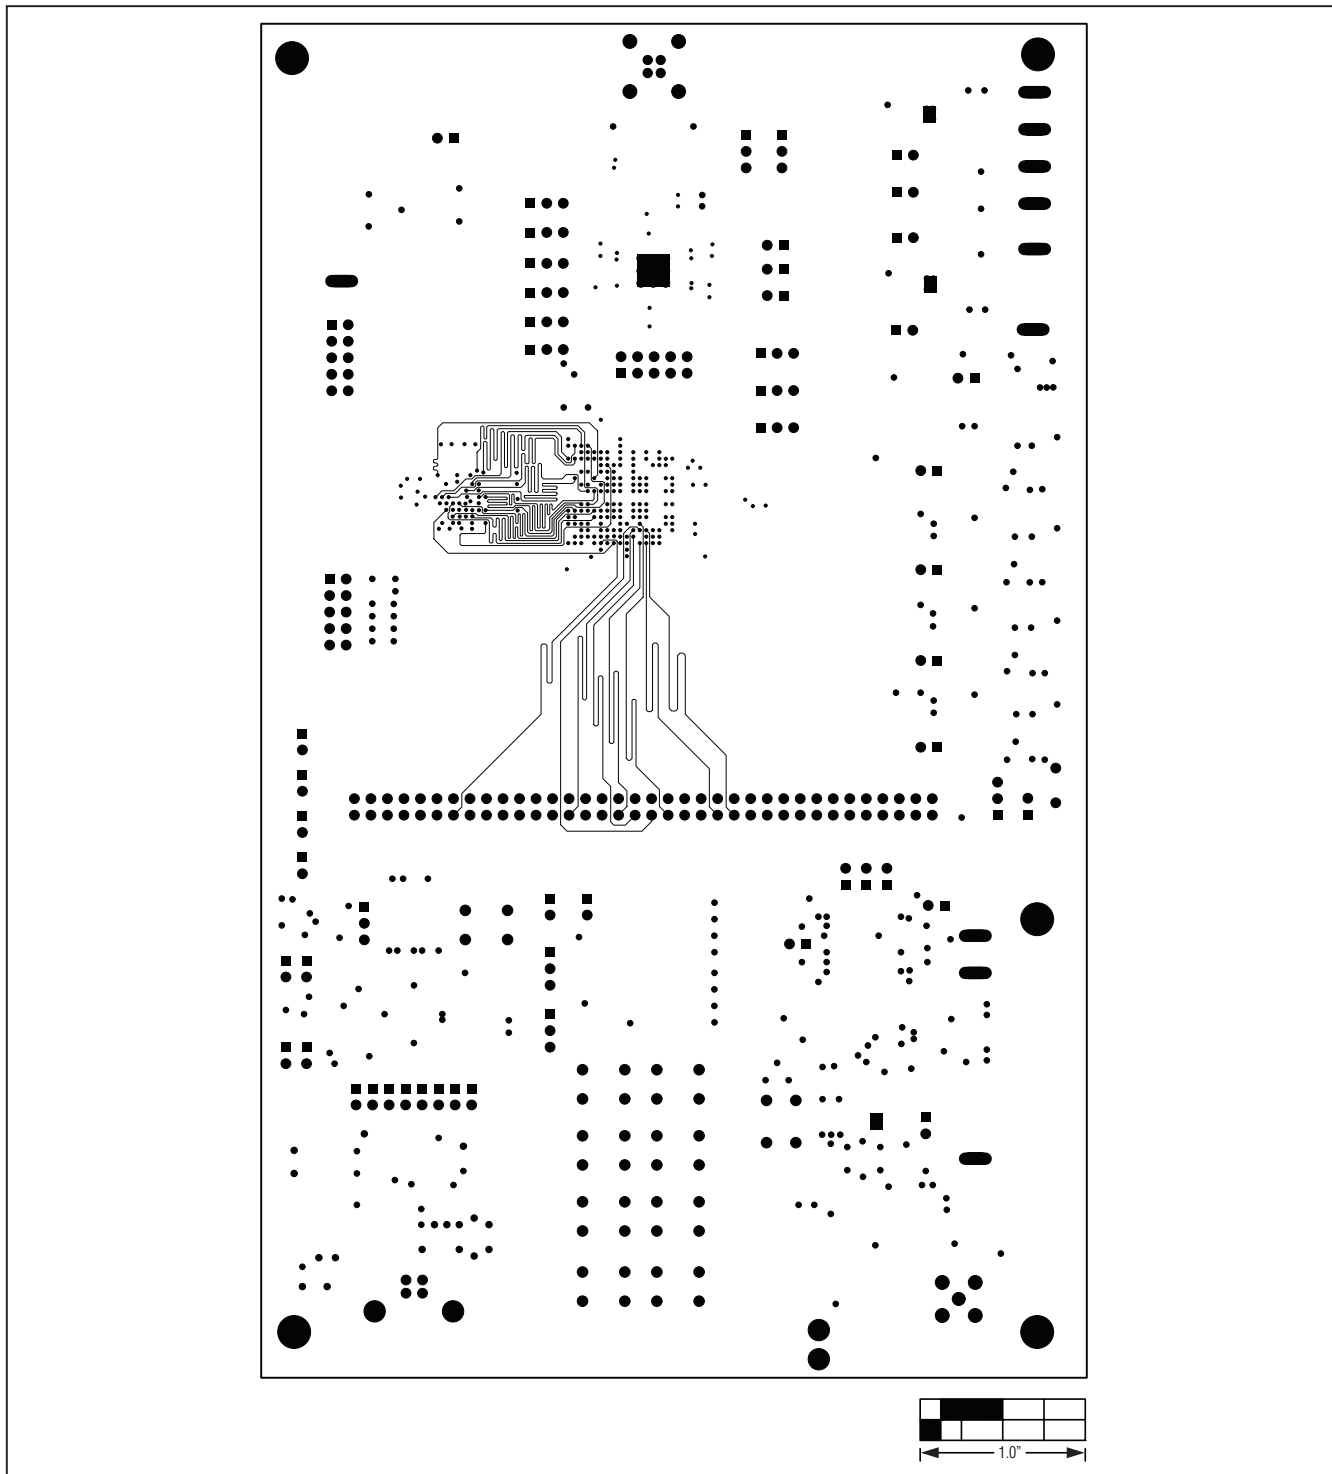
MAX9249 EV Kit PCB Layout—Signal Layer 3
